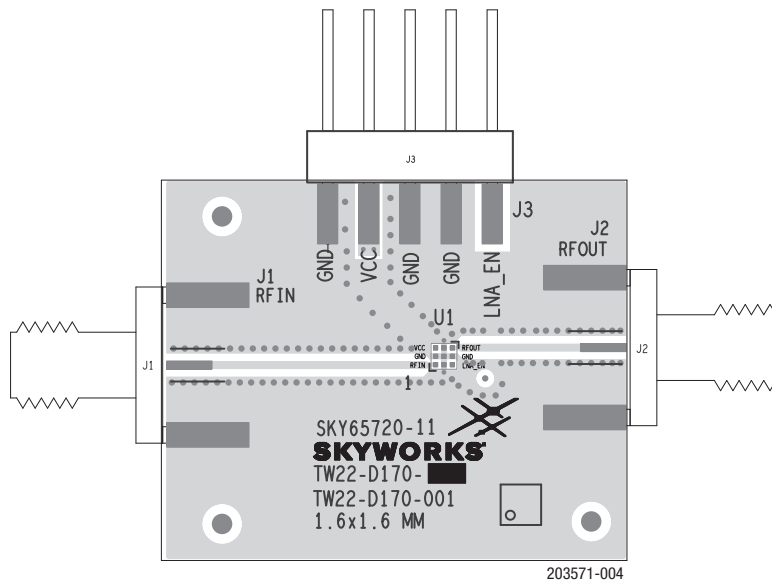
SKY65720-11 Evaluation Board Assembly Diagram
